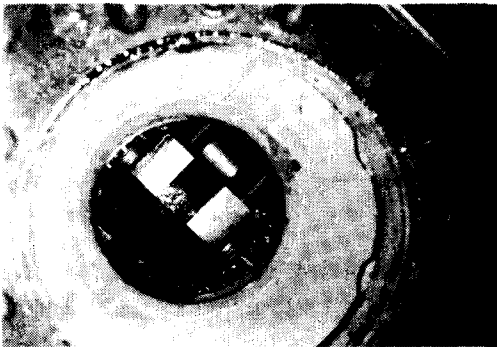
Erosion · crevice corrosion in contact face of engine block O-ring
